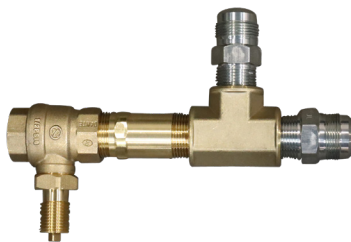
Constructing the Key Valve assembly that will connect to the Platinum or Cobalt Valve
